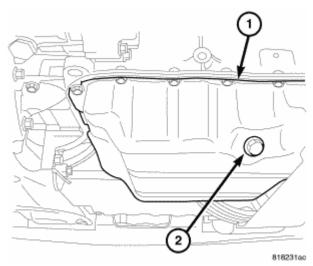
Oil Drain Plug Courtesy of CHRYSLER LLC
